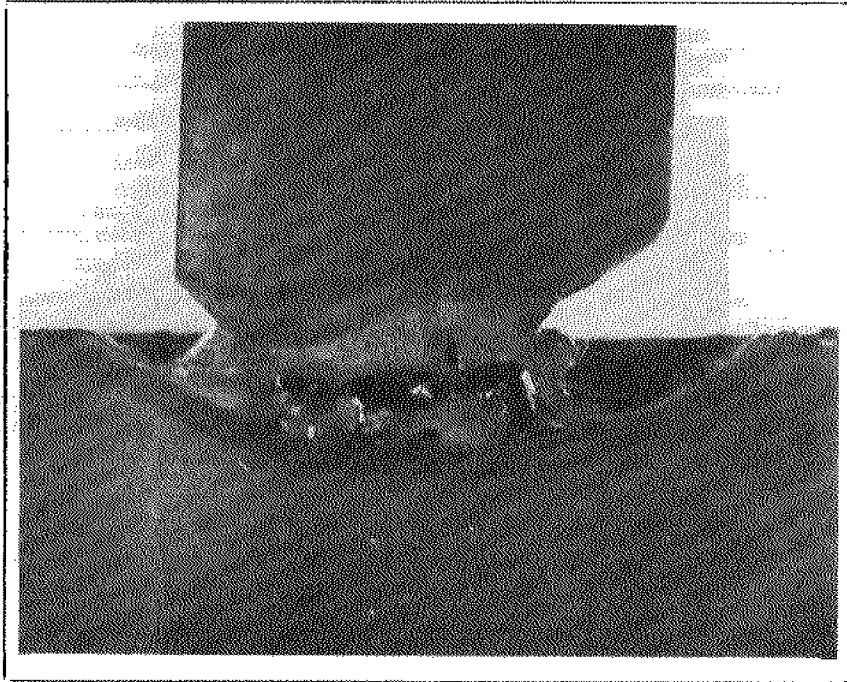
Weld defect --- Extremely hot weld
